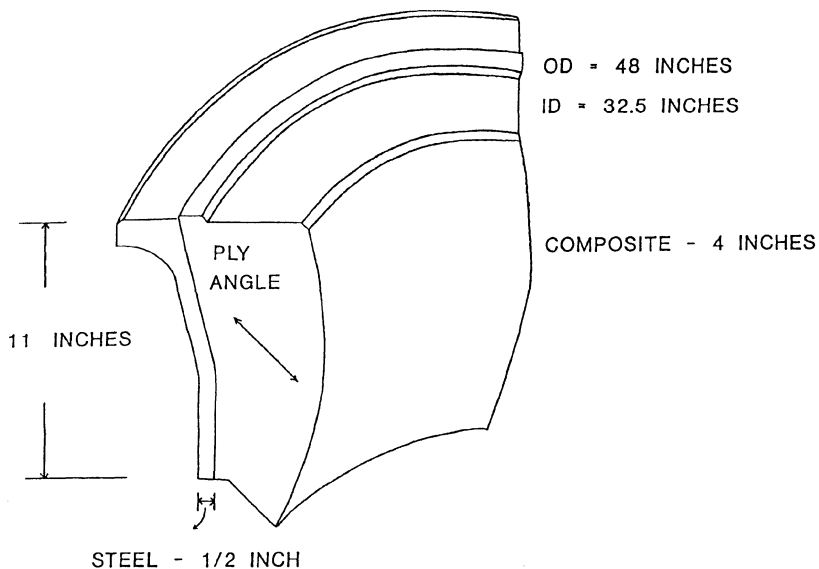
Schematic Drawing of A Section of A Typical Industrial Composite Assembly.
